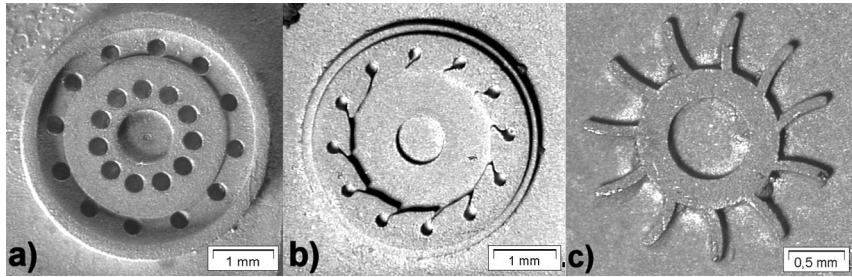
Turbine parts cast in gold base alloy. a) Housing; b) nozzle plate; c) (blade) wheel
